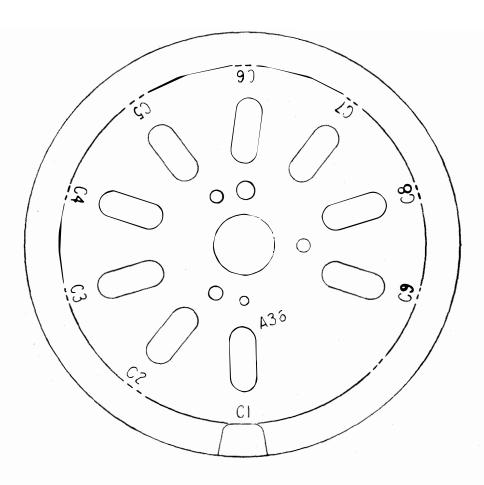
10 kHz Rotor Subassembly A2A4A36, Component Locations
